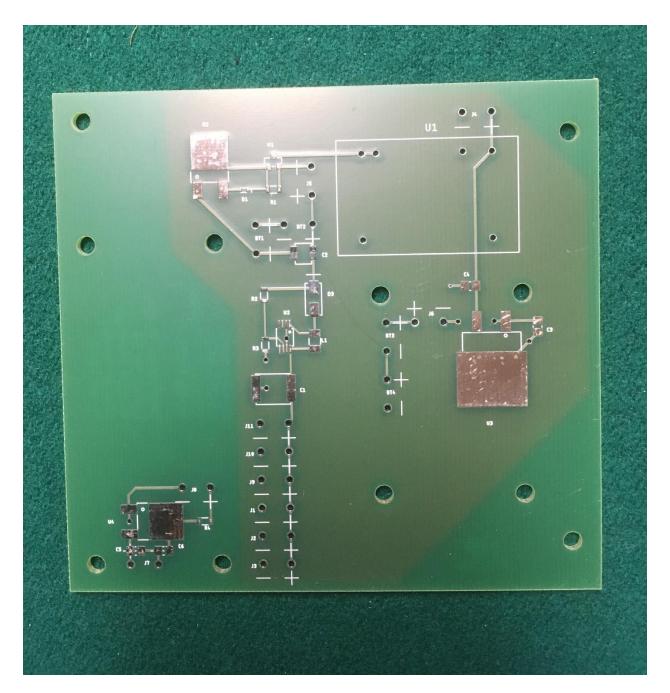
CACTUS – Hermes 3.0 power board unpopulated PCB
